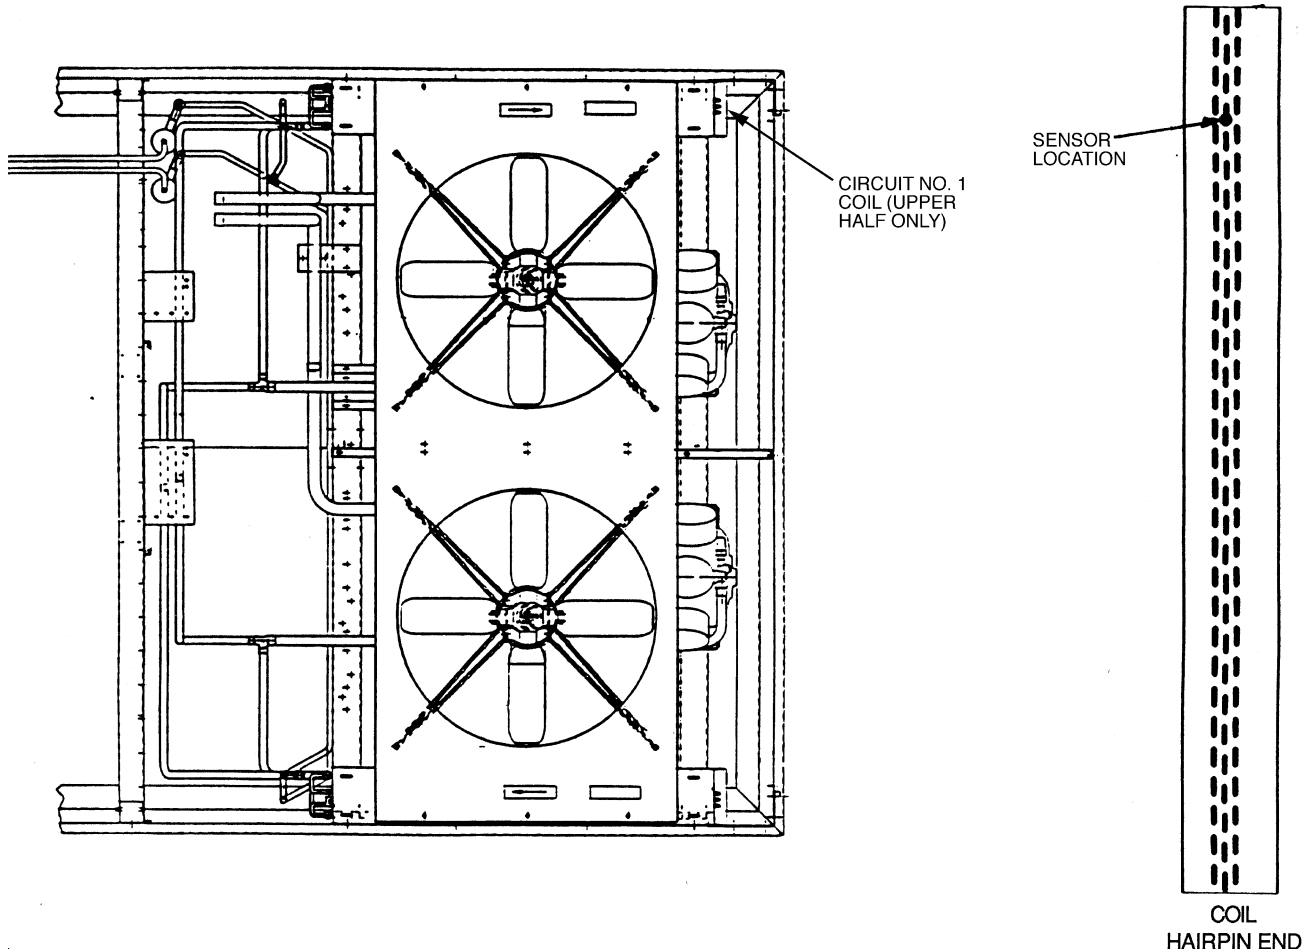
Motormaster® I Control Sensor Location, Size 030,034,035, and 038 Units
